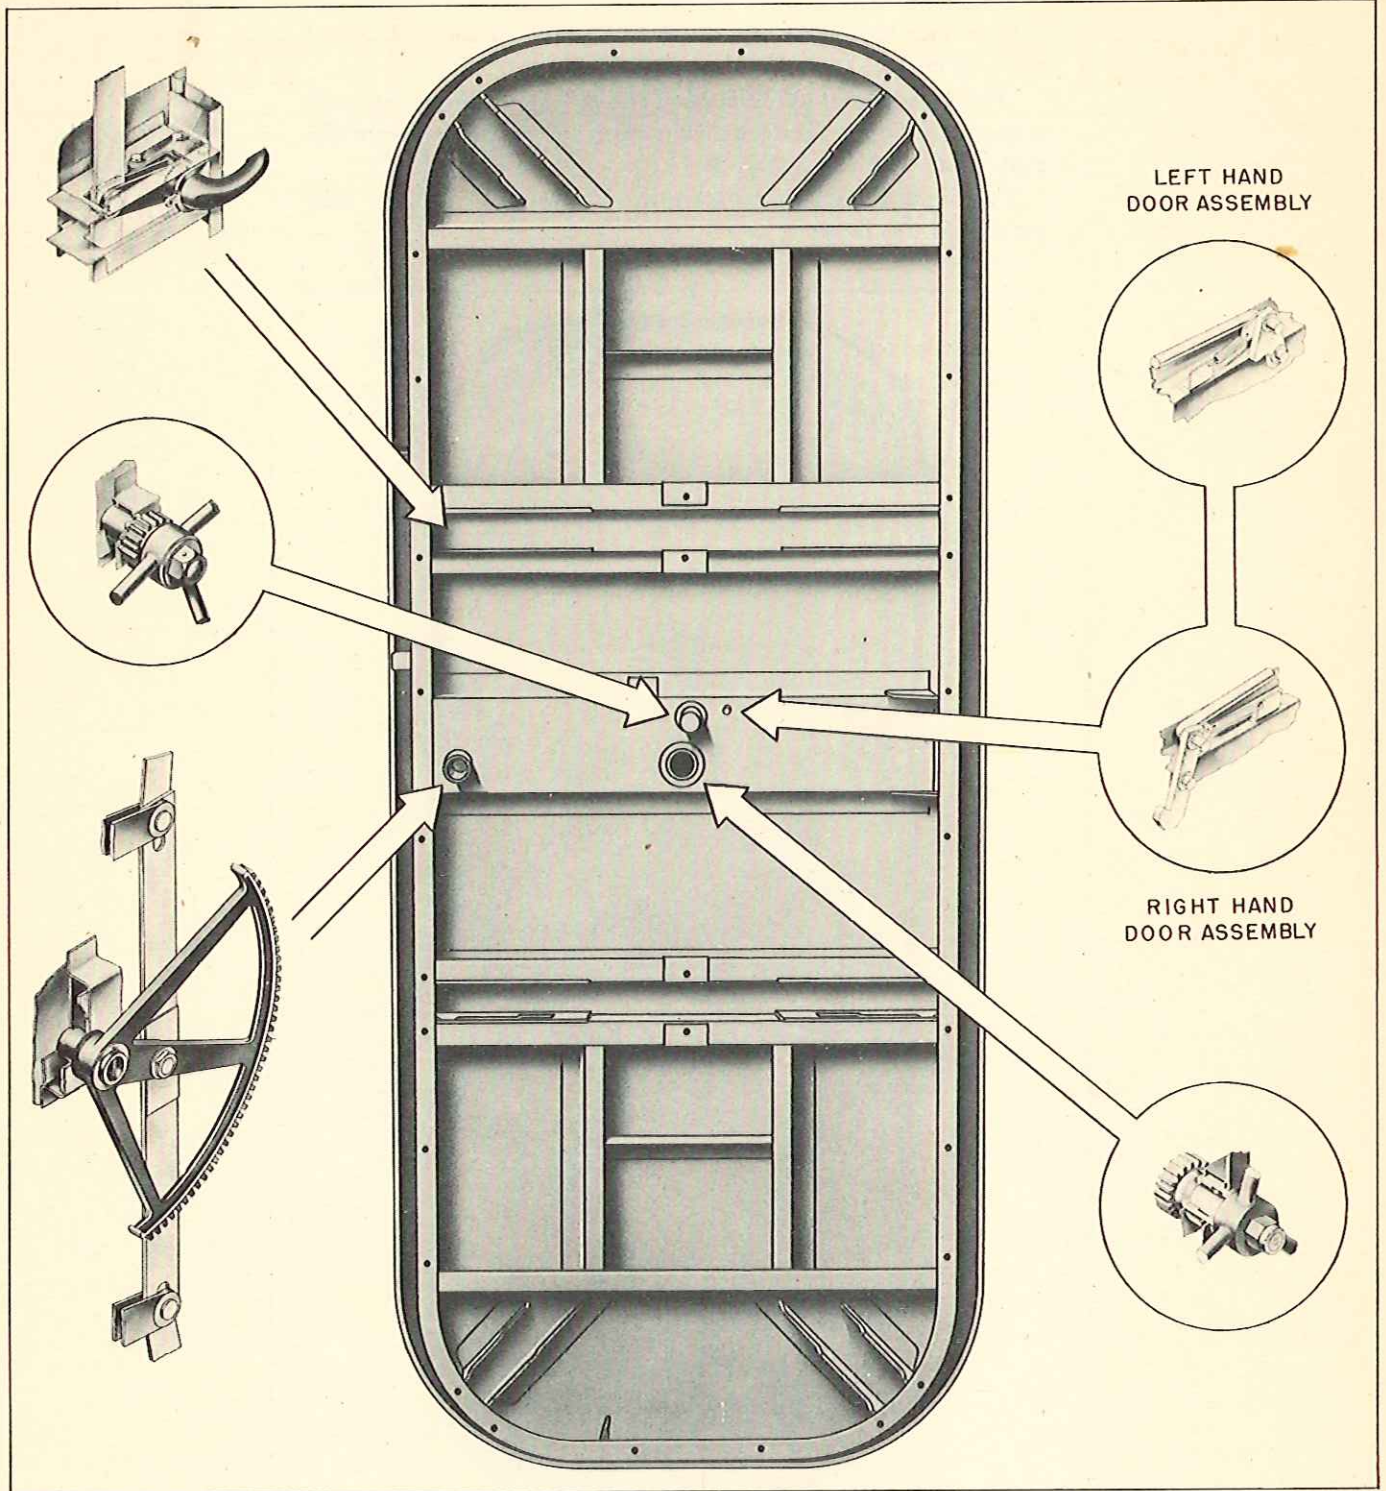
Inside view, TLD-2(crs) door, showing shell with main assemblies pulled out.
